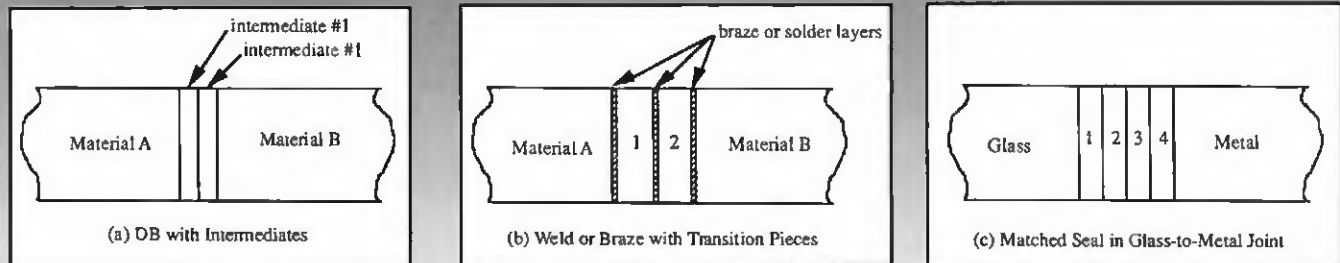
Schematic of stepped functionally gradient material (FGM) joints in: A — diffusion brazing/welding using single or multiple intermediates or interlayers; B — welded, brazed or soldered joints using multiple layers or transition pieces; C — multiple transition pieces used in producing "matched seals" between glasses or between a glass and a metal.
